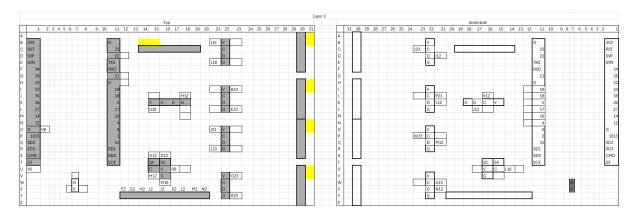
PCB Schematic for the lower Mk.3 PCB
